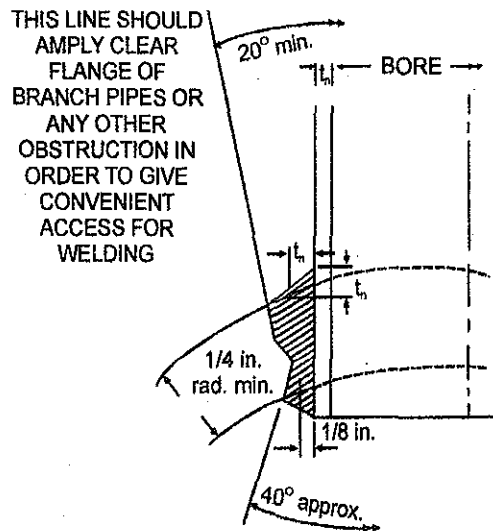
D — WELDED IN STANDPIPE OR BRANCH
